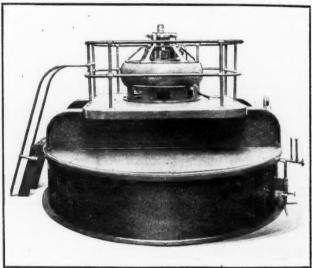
Welded Steel Frame for Vertical Waterwheeldriven Generator
